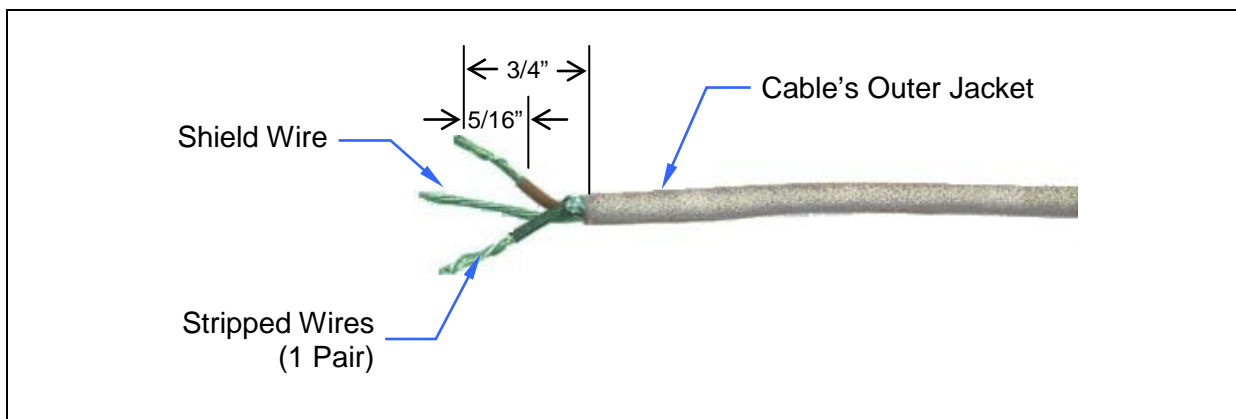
Dimensions for Stripping 2-Wire (with Shield) CAN Cables
